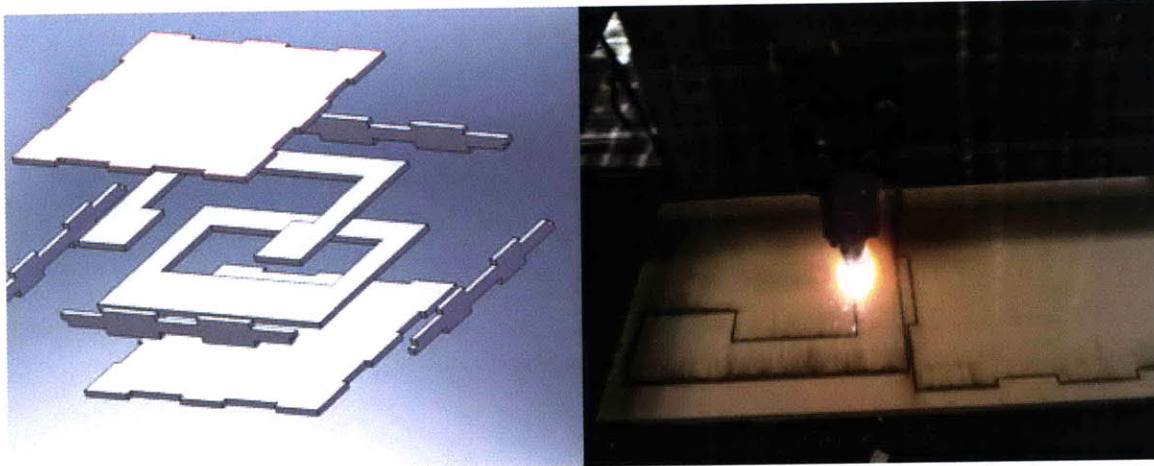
3-D view of CAD design used for construction of game puzzle board (Left), with laser cutting of wood used for construction of game board (right).
